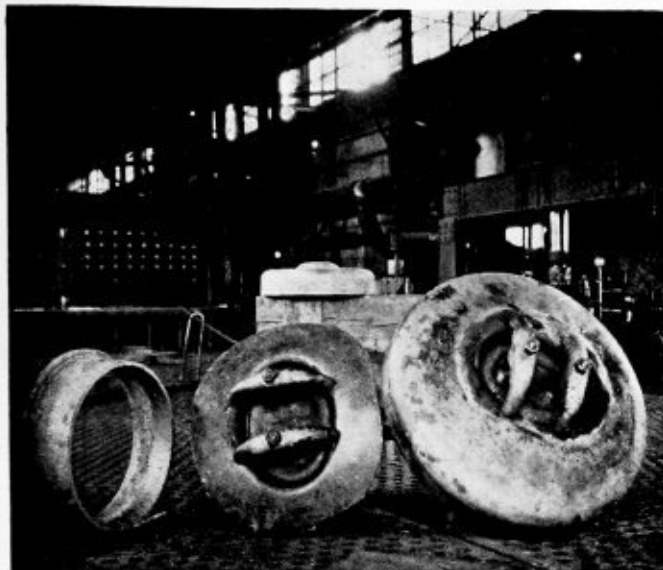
Standard Manhole Plates and Fittings, and Flanged and Dished Heads
